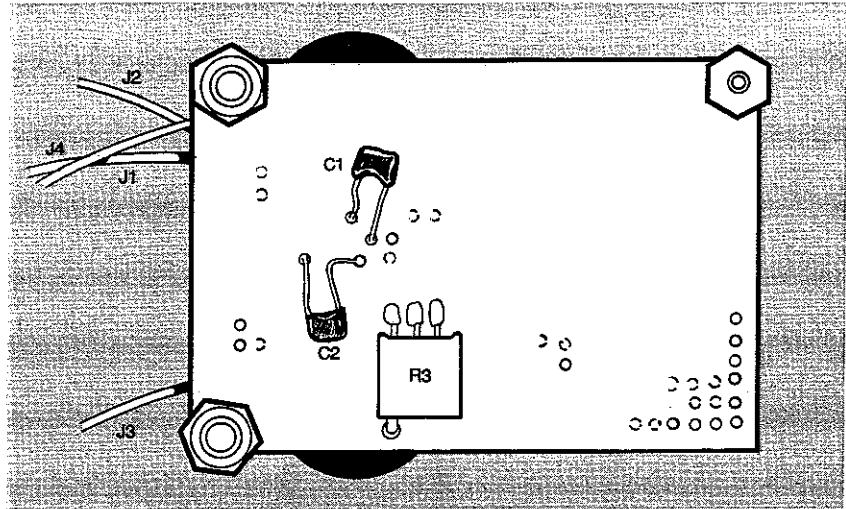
Here is the bottom side of the Conductance Adapter. If you use a slightly larger board, these components can be placed on the top side along with the rest of the components.
